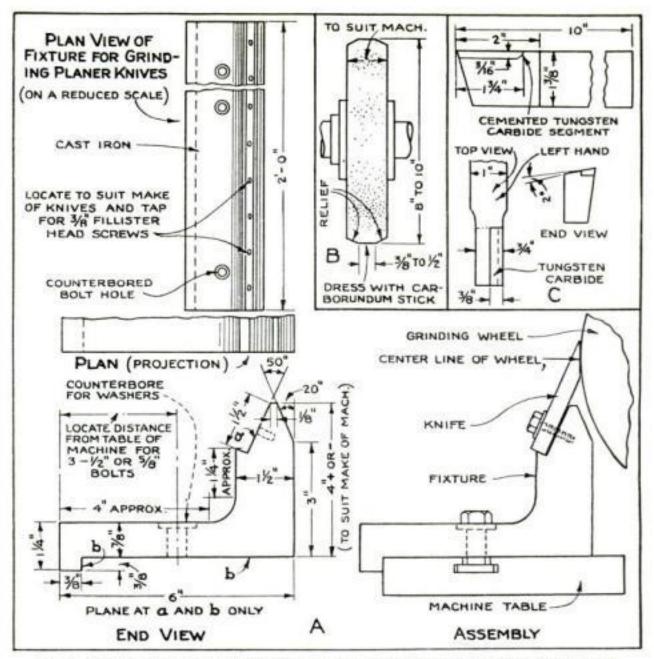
End, top, and assembly views of a fixture for grinding planer knives (A), how the wheel should be dressed (B), and a lathe tool with a tungsten carbide steel insert (C)
